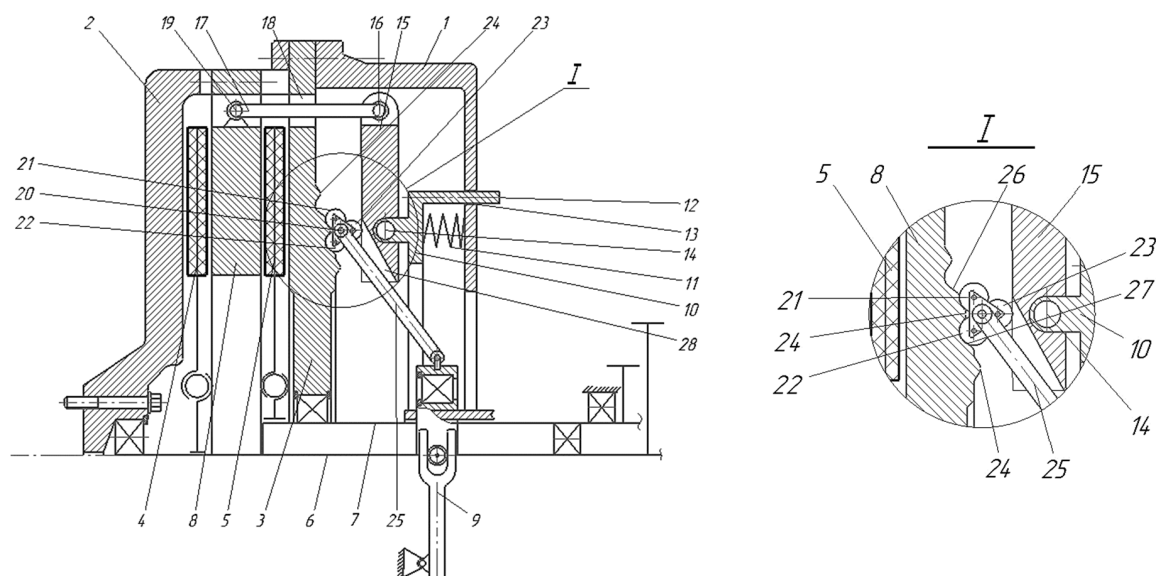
The original DCT design: 1—casing; 2—flywheel; 3—platter; 4,5—driven discs; 6,7—shafts; 8—pressure plate; 9—drive mechanism; 10—additional disc; 11—pressure springs; 12—elements; 13, 18—holes; 14, 16, 19—hinges; 15—rotary stops; 17, 25—levers; 20—movable supports; 21–23—rollers; 24—clamps; 26, 27—surfaces; 28—inclined grooves.
